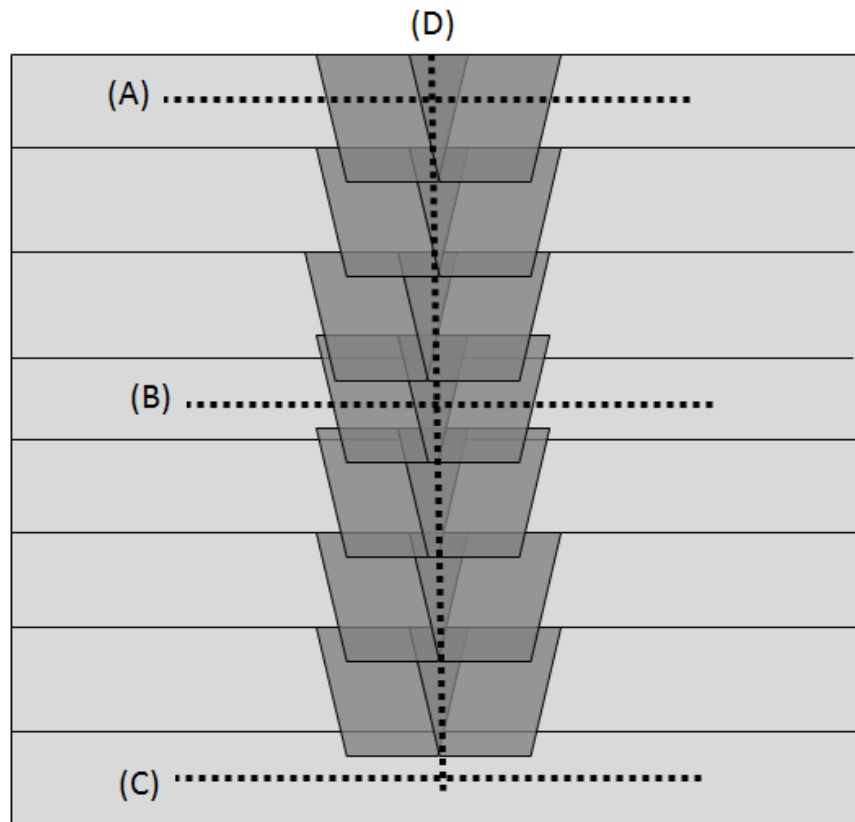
Hardness testing positions within lap weld layers
